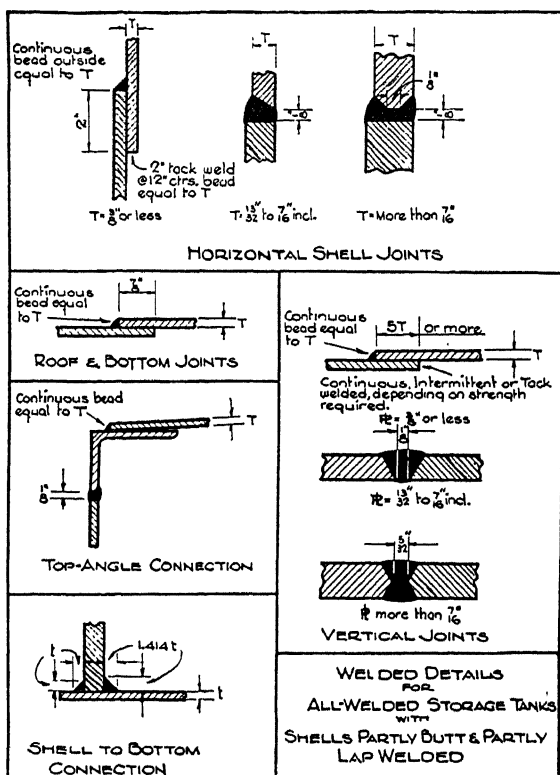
Details for tanks with butt and lap welded shells.
